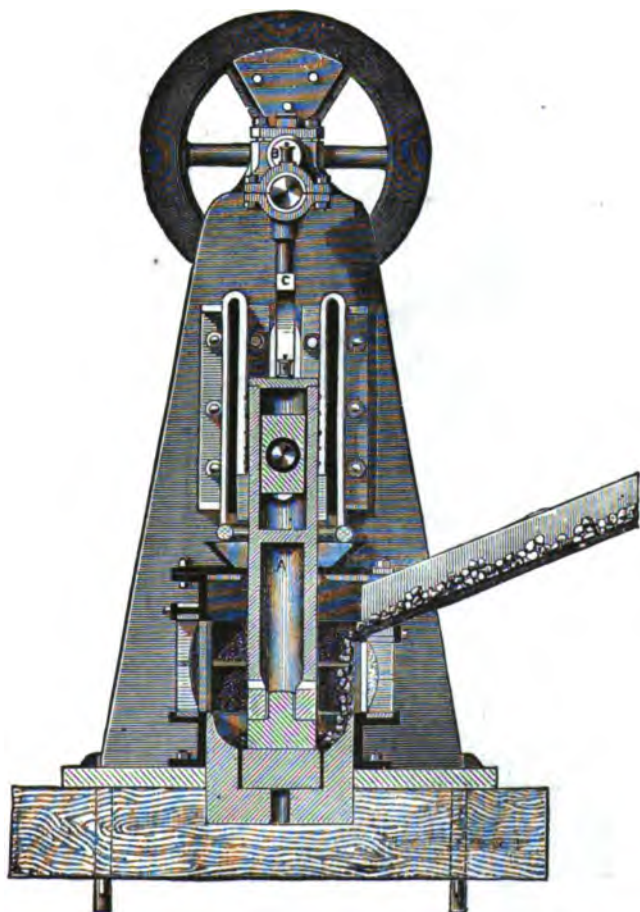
SECTIONAL VIEW OF SHOLL'S PNEUMATIC STAMP.
